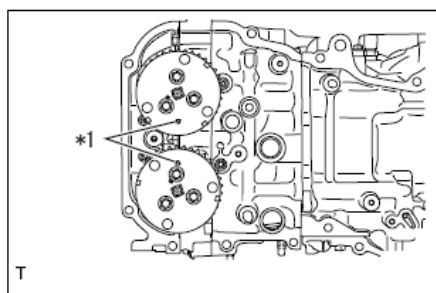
Identifying Alignment Marks On Crankshaft Timing Sprocket, Camshaft Timing Intake And Exhaust Gear Assembly LH
